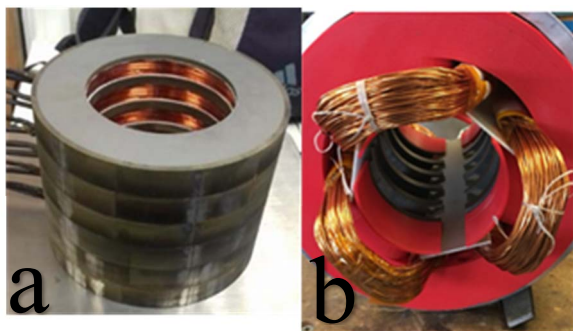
The stators of two cylindrical machines developed for the free piston engine: (a) Permanent magnet synchronous and (b) transverse flux [5, 8].
